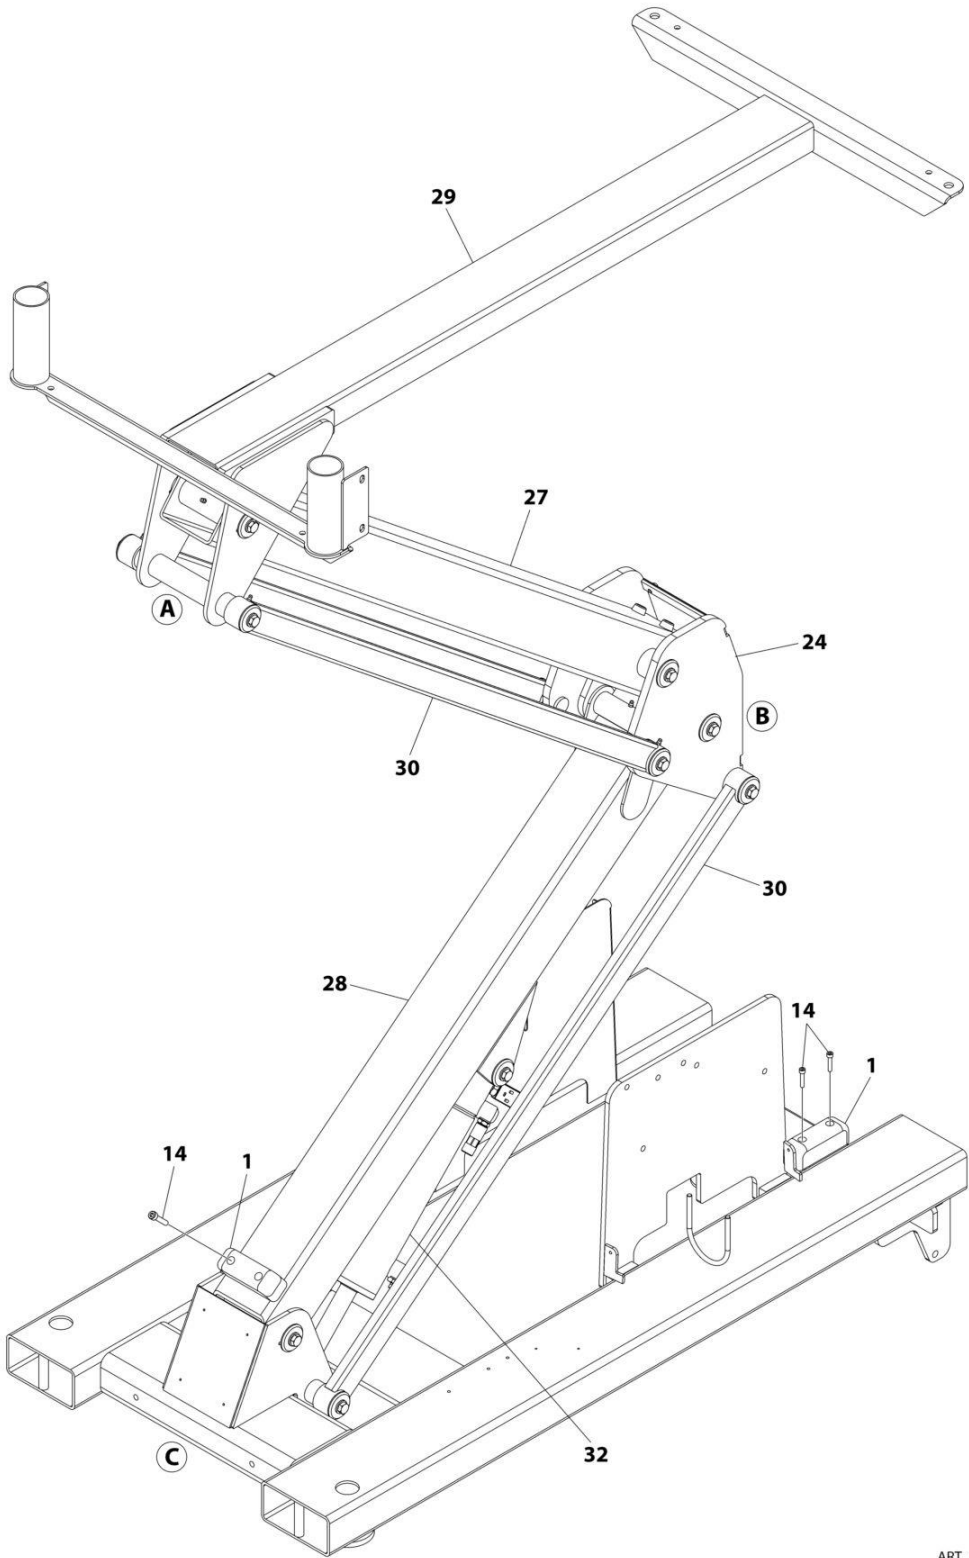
PLATFORM BOX ASSEMBLY
